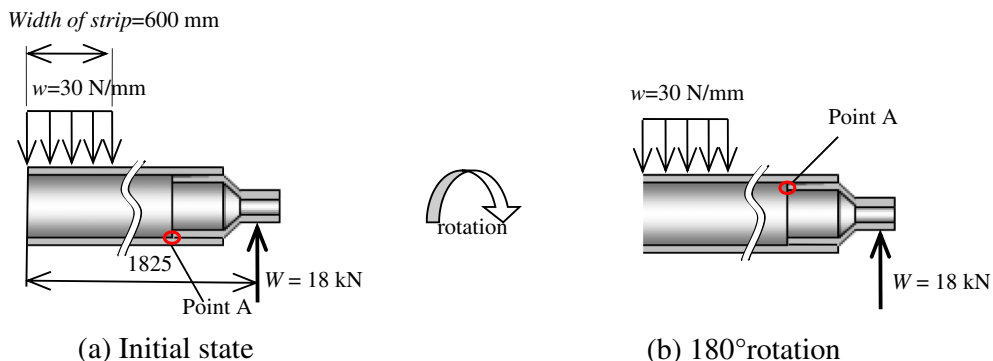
Dimensions and loading condition of new roller (a) initial state; (b) 180° rotation.
